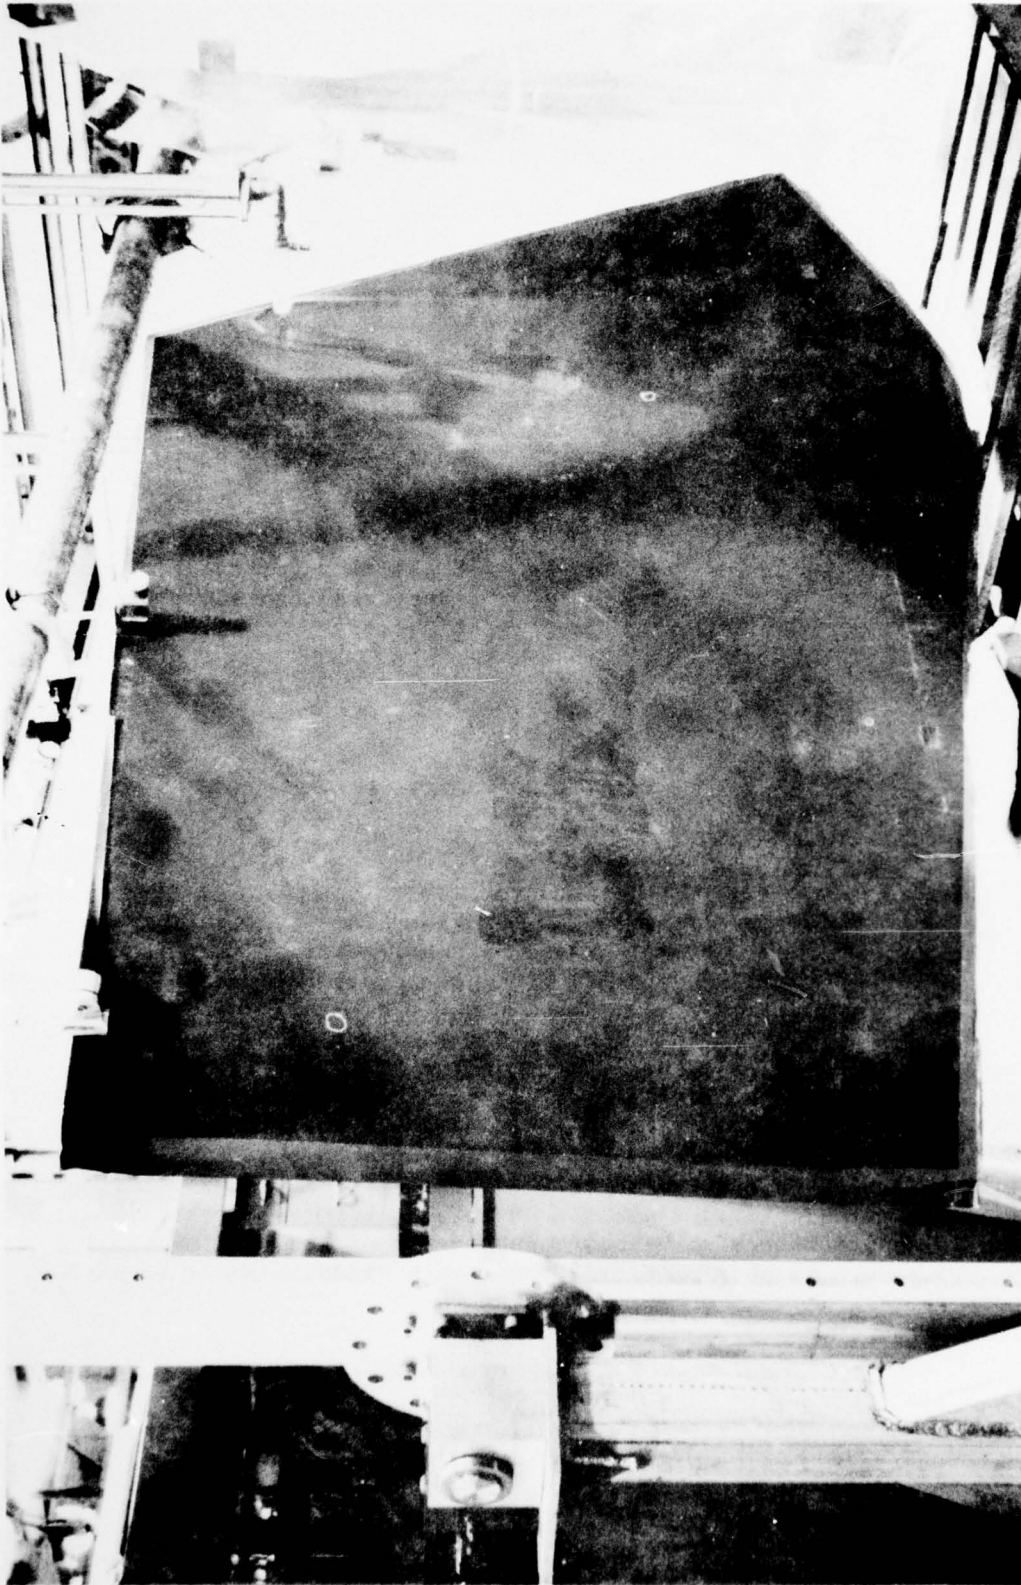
ULTRASONIC INSPECTION OF LOWER SKIN SANDWICH PANEL
